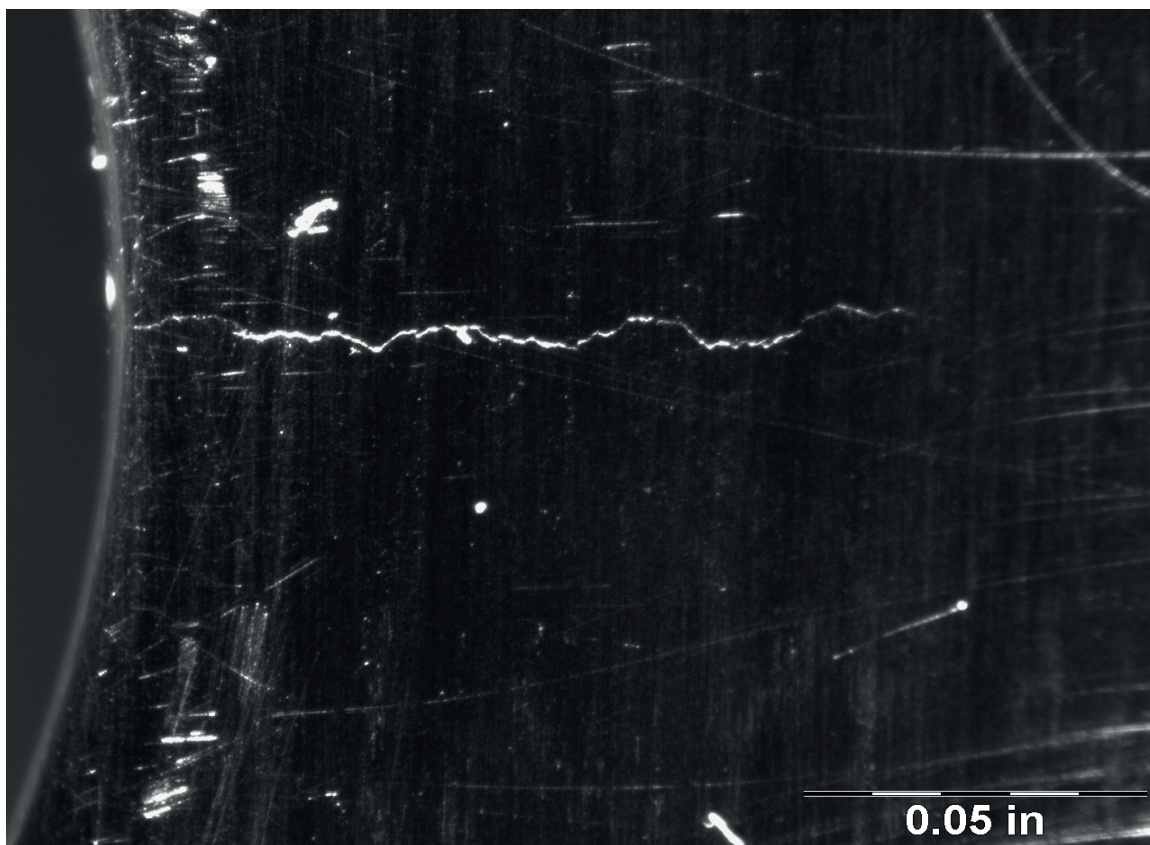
Image of Surface Crack in Coupon Cx4N1-05-B, Surface Crack Length is 0.1259 inch.
